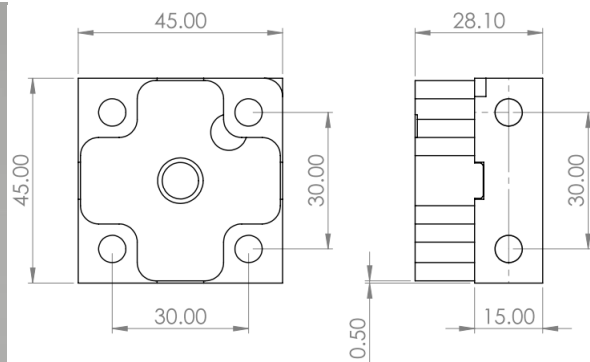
Sample holder and its dimensions, in millimeters. The weight of one sample holder with two M5 screws is 140g. Dimensions are in millimeters and technical drawings are reported in Appendix E.
